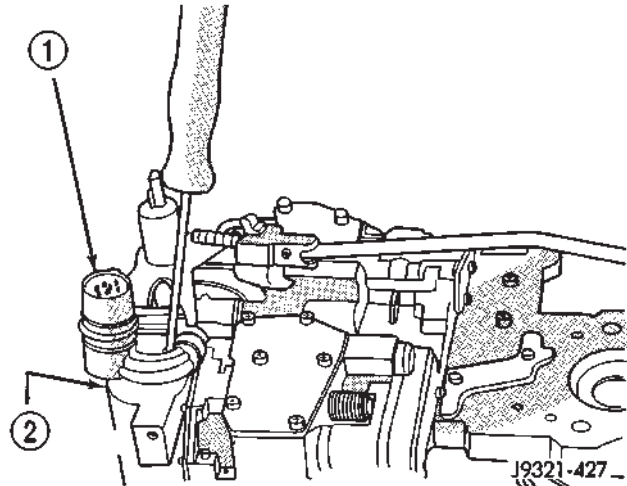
Solenoid Harness Case Connector Shoulder Bolt
